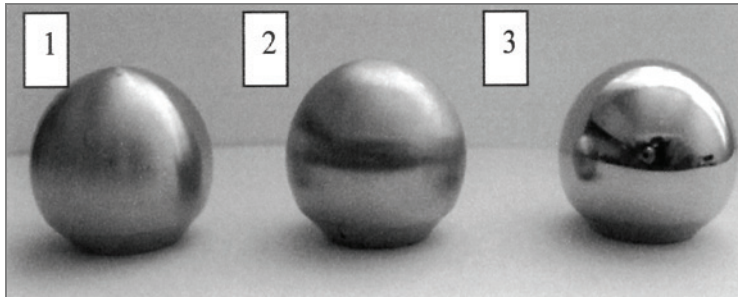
Hip joint prosthesis heads after consecutive stages of machining
